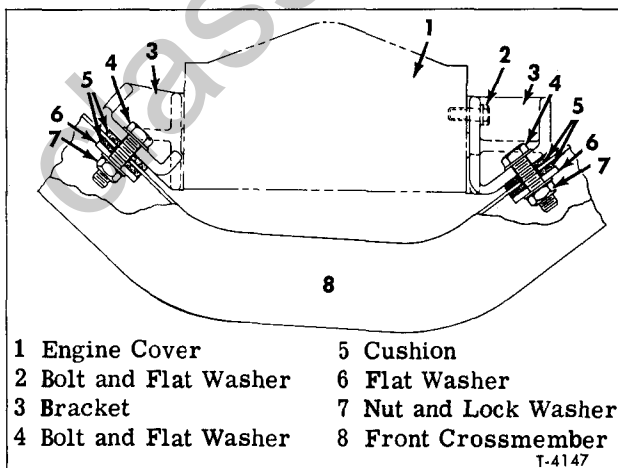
Engine Front Mounting on Conv. Cab 90 Series (In-Line Diesel Engine)
